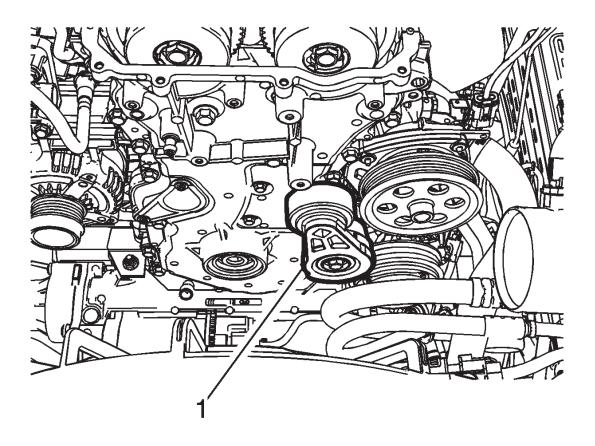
Drive Belt Tensioner Courtesy of GENERAL MOTORS COMPANY
